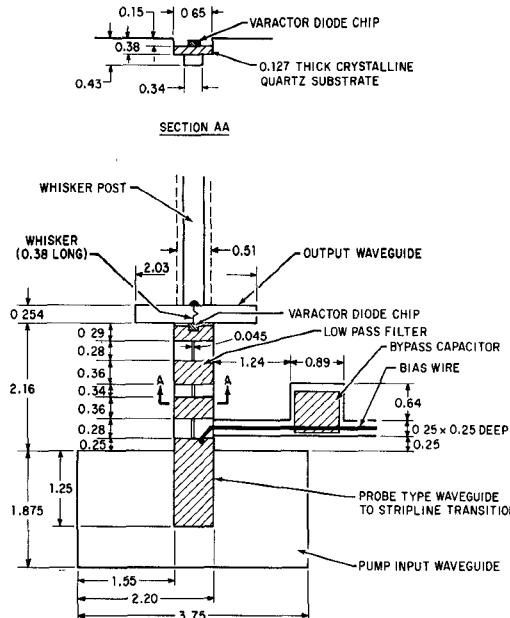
A sketch showing details of the varactor mounting structure and stripline low-pass filter. Dimensions are in millimeters.
